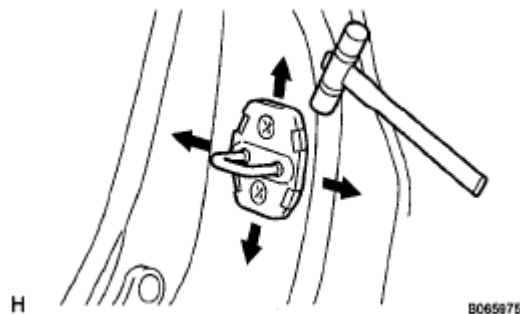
Adjusting Rear Door Lock Striker Plate Assembly
